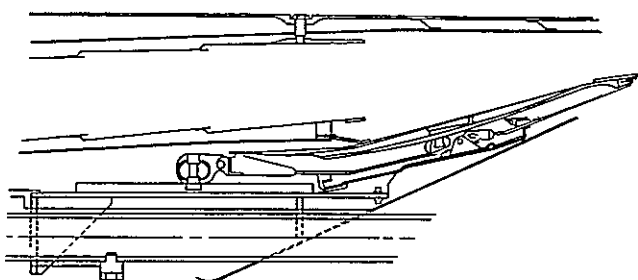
TF30-P-100 Exhaust Nozzle - This nozzle, as shown installed in the testbed, is mechanically and physically compatible
